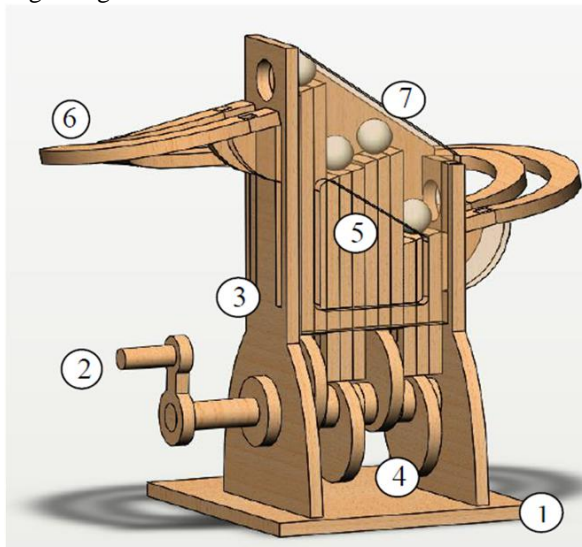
Parts of SMM assembly: 1-stand, 2- crank, 3- housing, 4-cams, 5-stairs, 6-track, 7-balls
